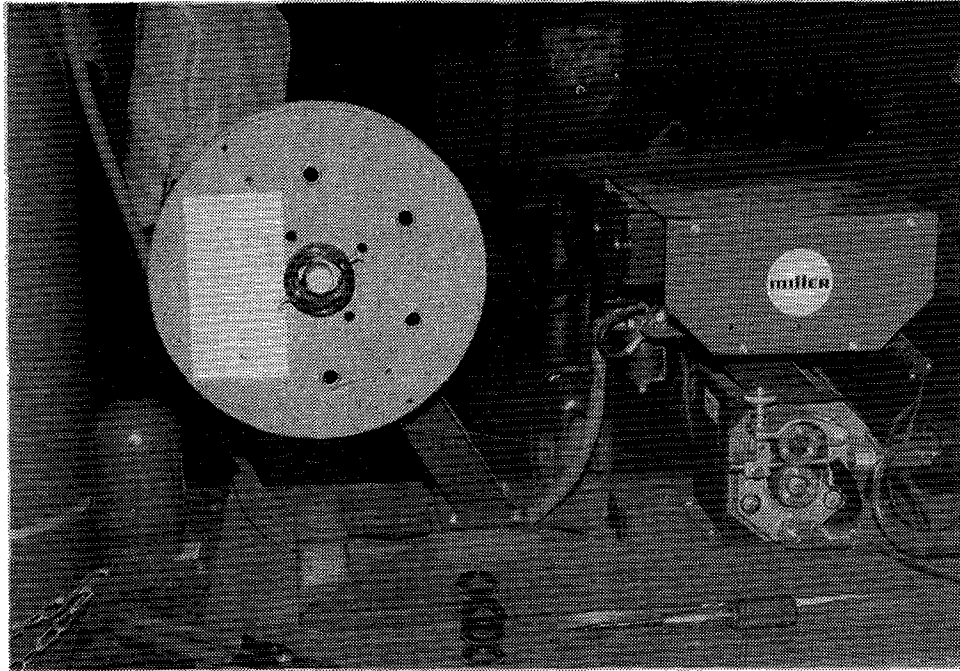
Welding System Showing Wire Spool and Line Wire Feeder
